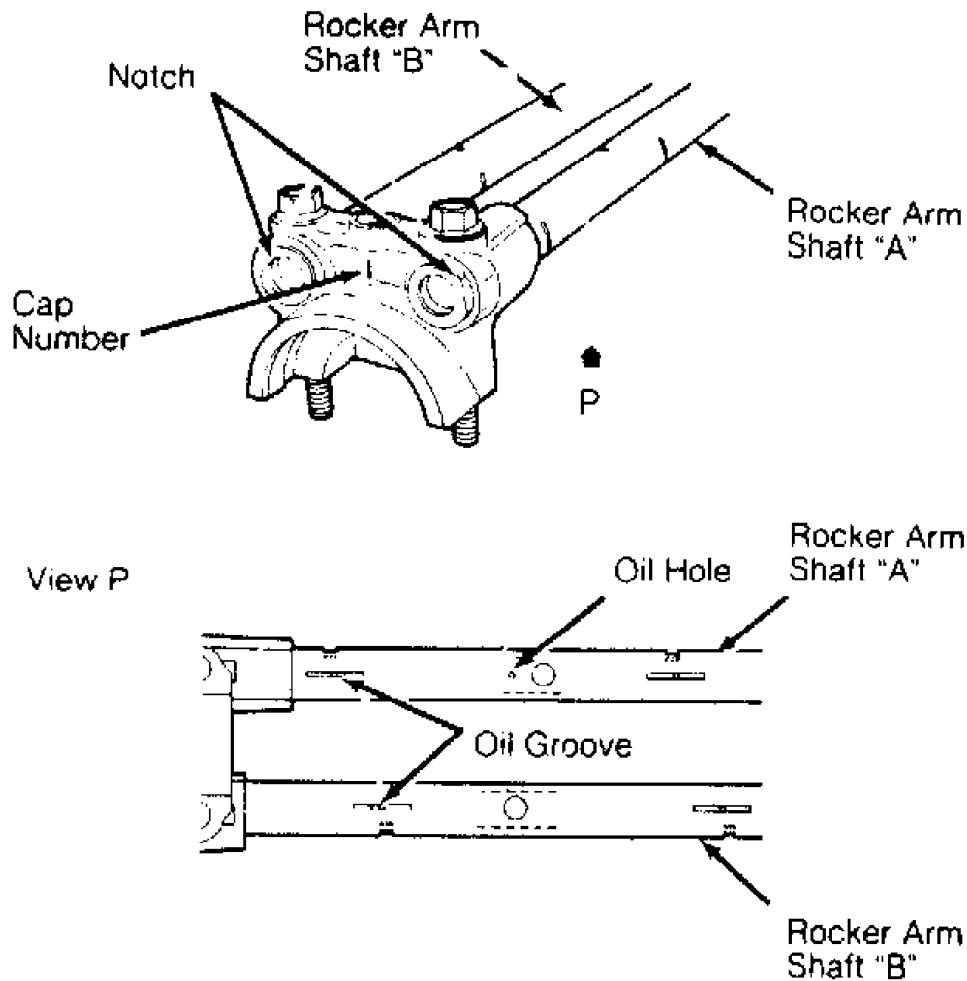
Installing Rocker Arm Shafts (SOHC)
